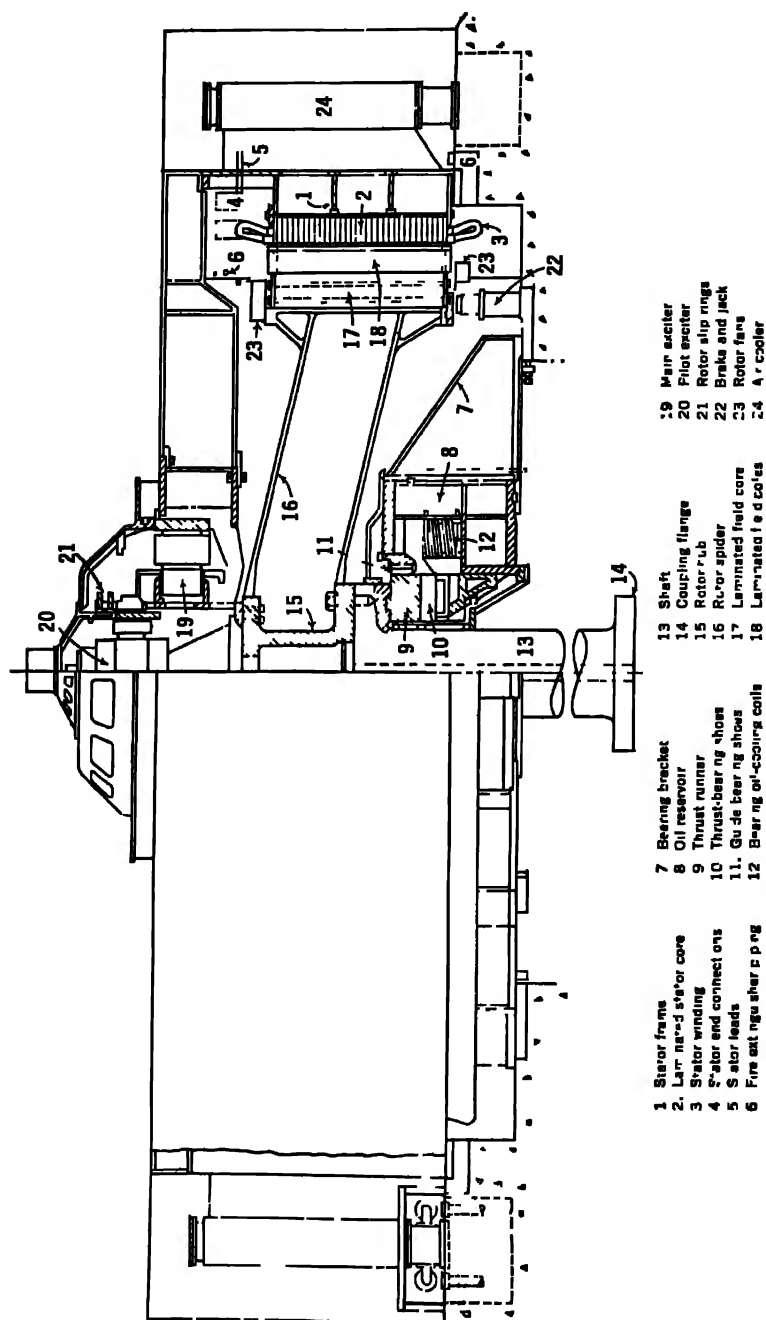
Sectional view of typical vertical water-wheel-driven generator (Westinghouse Electric Corp.)
